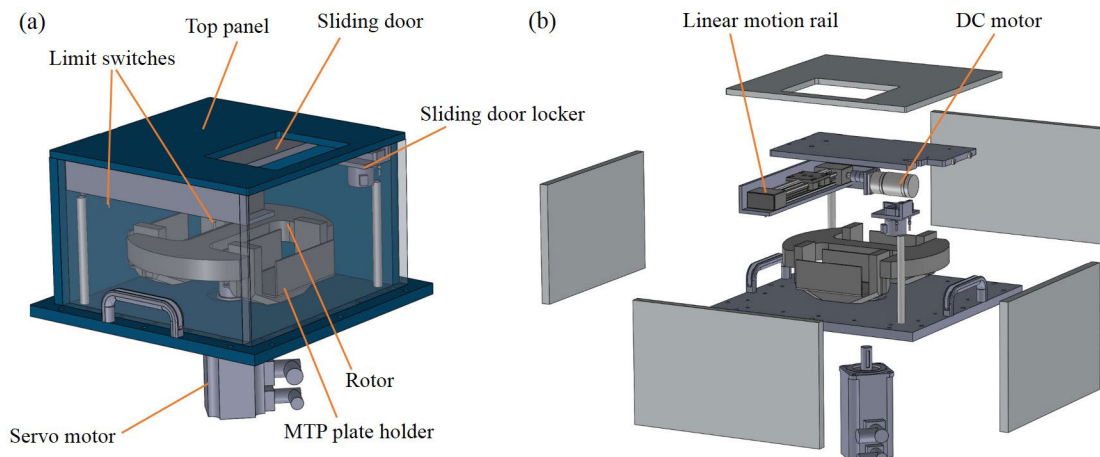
The 3D model of the centrifuge module (a) and its exploded view which shows the internal components and structure (b).
